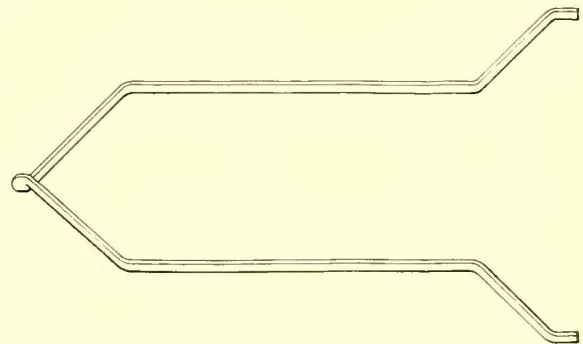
SHAPE OF "STRAIGHT OUT" COIL
